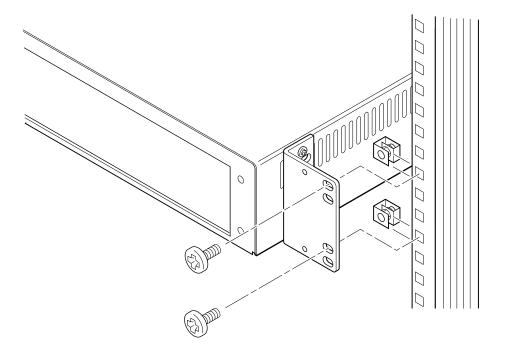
Installing Rack Mount Shelf in the Equipment Rack
